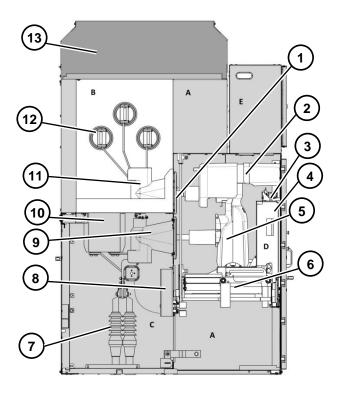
Sectional view of circuit-breaker panel with HV HRC fuse design
